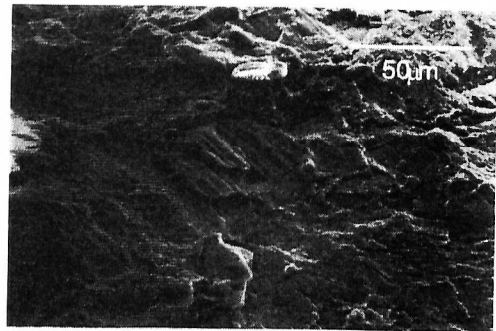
ALFSOTATS RS-W fracture surface
